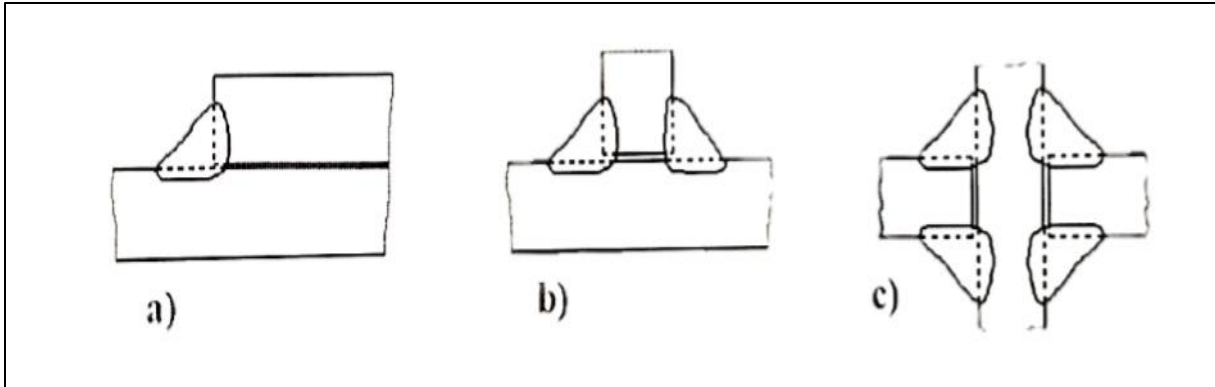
Fillet welds in different joint configurations – (a) lap joint, (b) T-joint, (c) cross joint [1]
